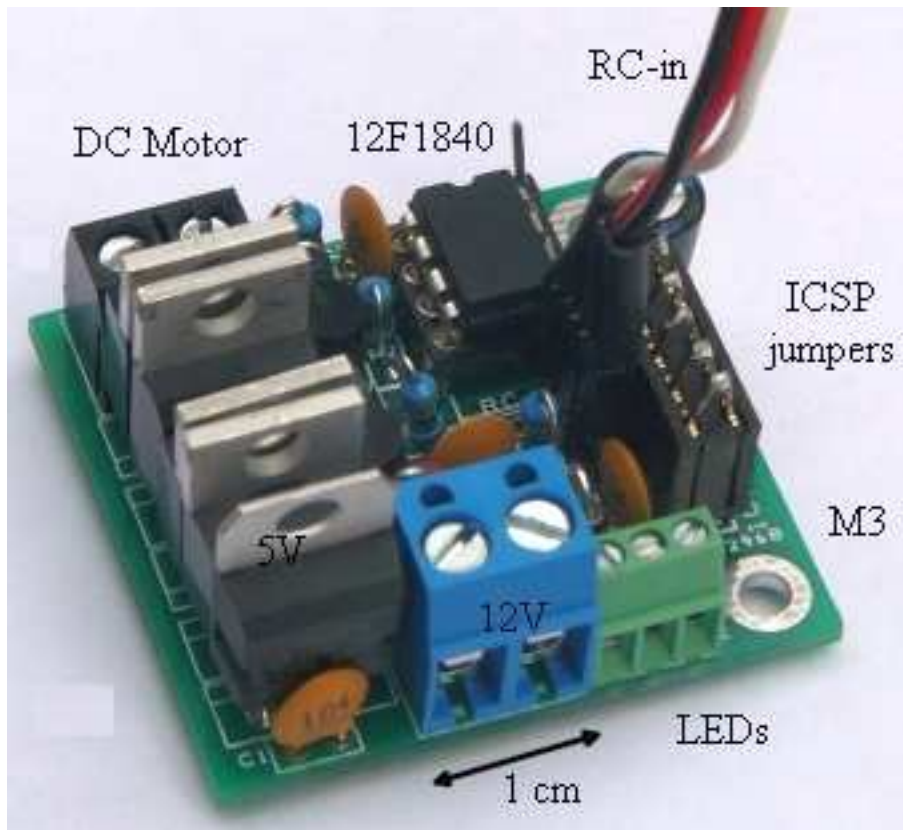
A. Printed Circuit Board (PCB) with discrete components. Board size is 35.5x38 mm
